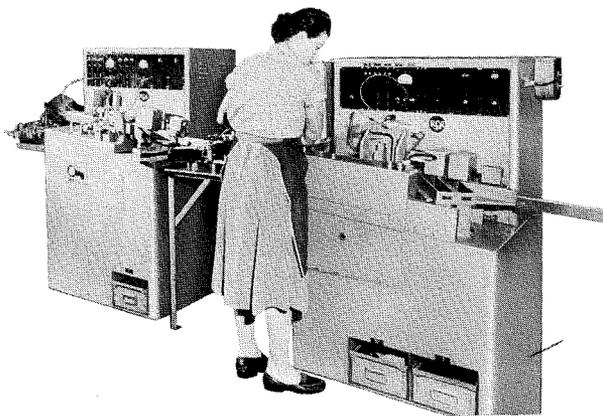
Two more RCA machines in operation at the Aetna Ball & Roller Bearing Company. Unit at left checks width and OD of bearing races. That at the right inspects assembled roller bearings for radial clearance.
